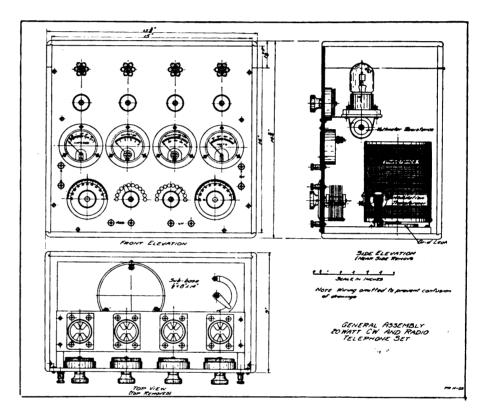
is a rear view of the panel removed from the cabinet. The builder should note especially the rigid type of bus wiring used, all connections being as straight and direct as possible. Fig. 2 is a general assembly drawing which will help to make clear certain points which cannot be readily seen from the photographs.
